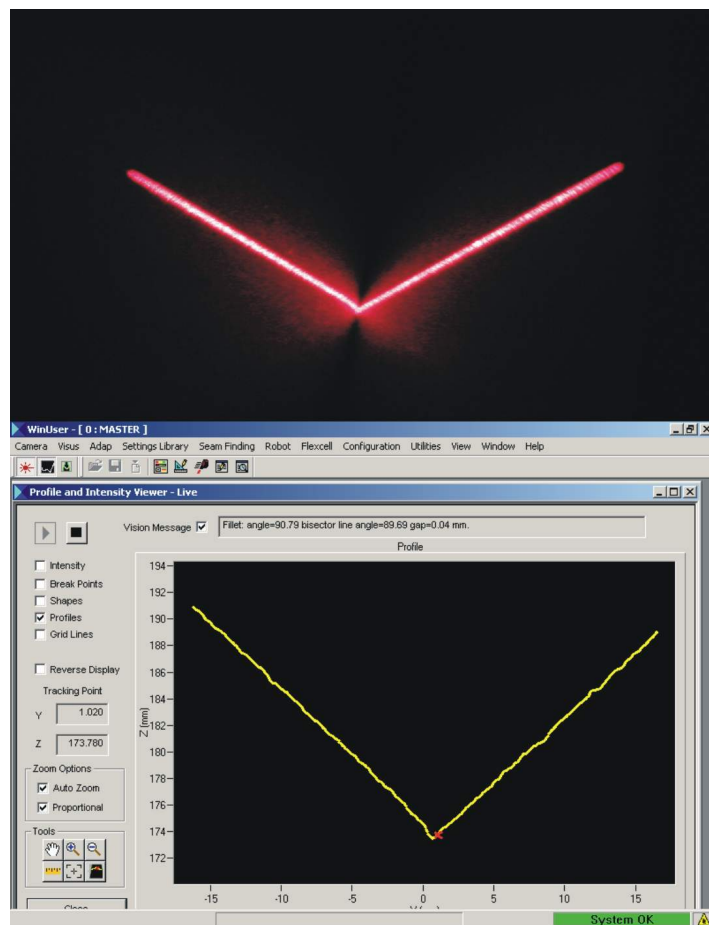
Laser profile sensor fitting the laser strip to a weld joint.
